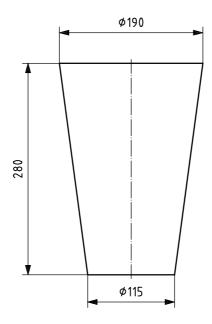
Test sample dimensions trans-femoral (above-knee) — Socket former
